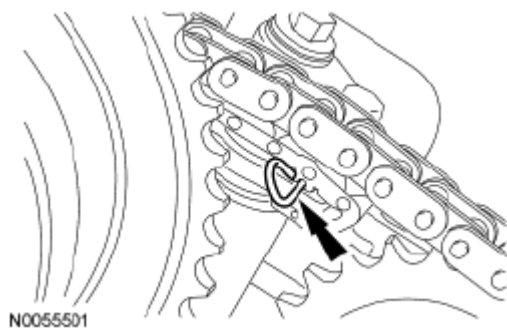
Locating LH Secondary Timing Chain Tensioner Lockpin
